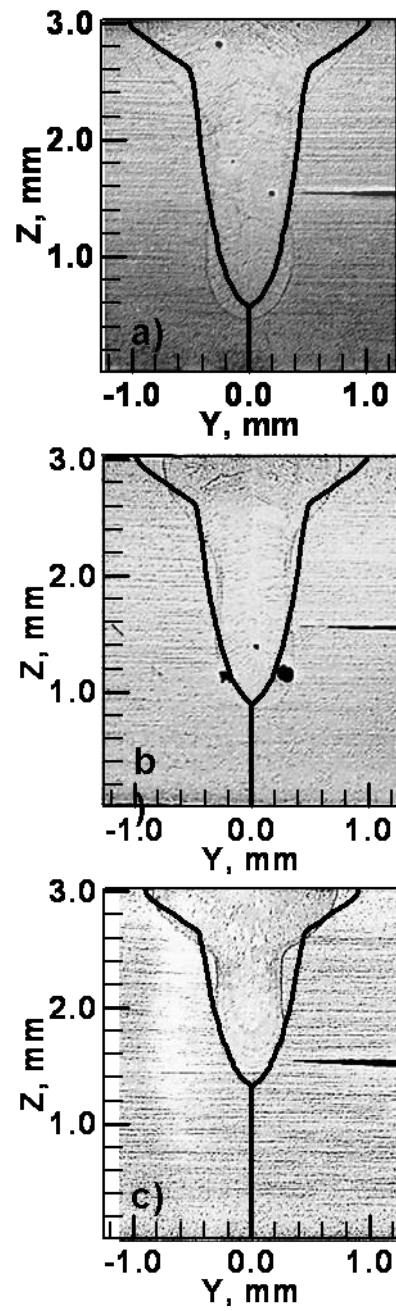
Comparison of weld pool cross-section with simulated weld pool cross-section of 304L stainless steel at 19 mm/s welding speed and input power of a) 1250 W b) 1000 W and c) 750 W.
